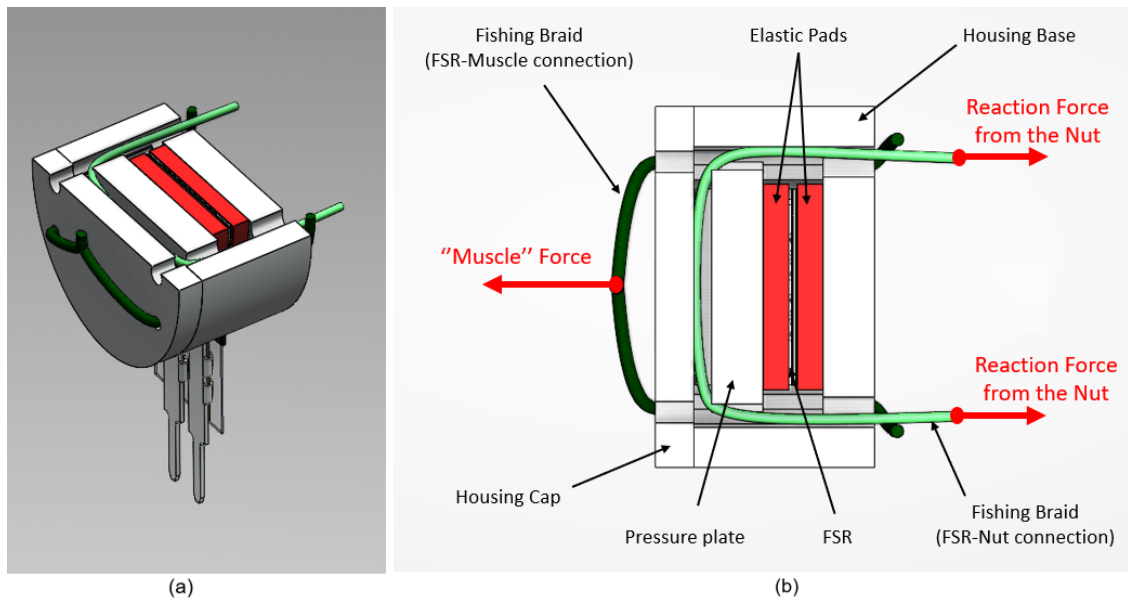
Working Principle of the FSR Housing - Section (a) Isometric View (b) Top View.
